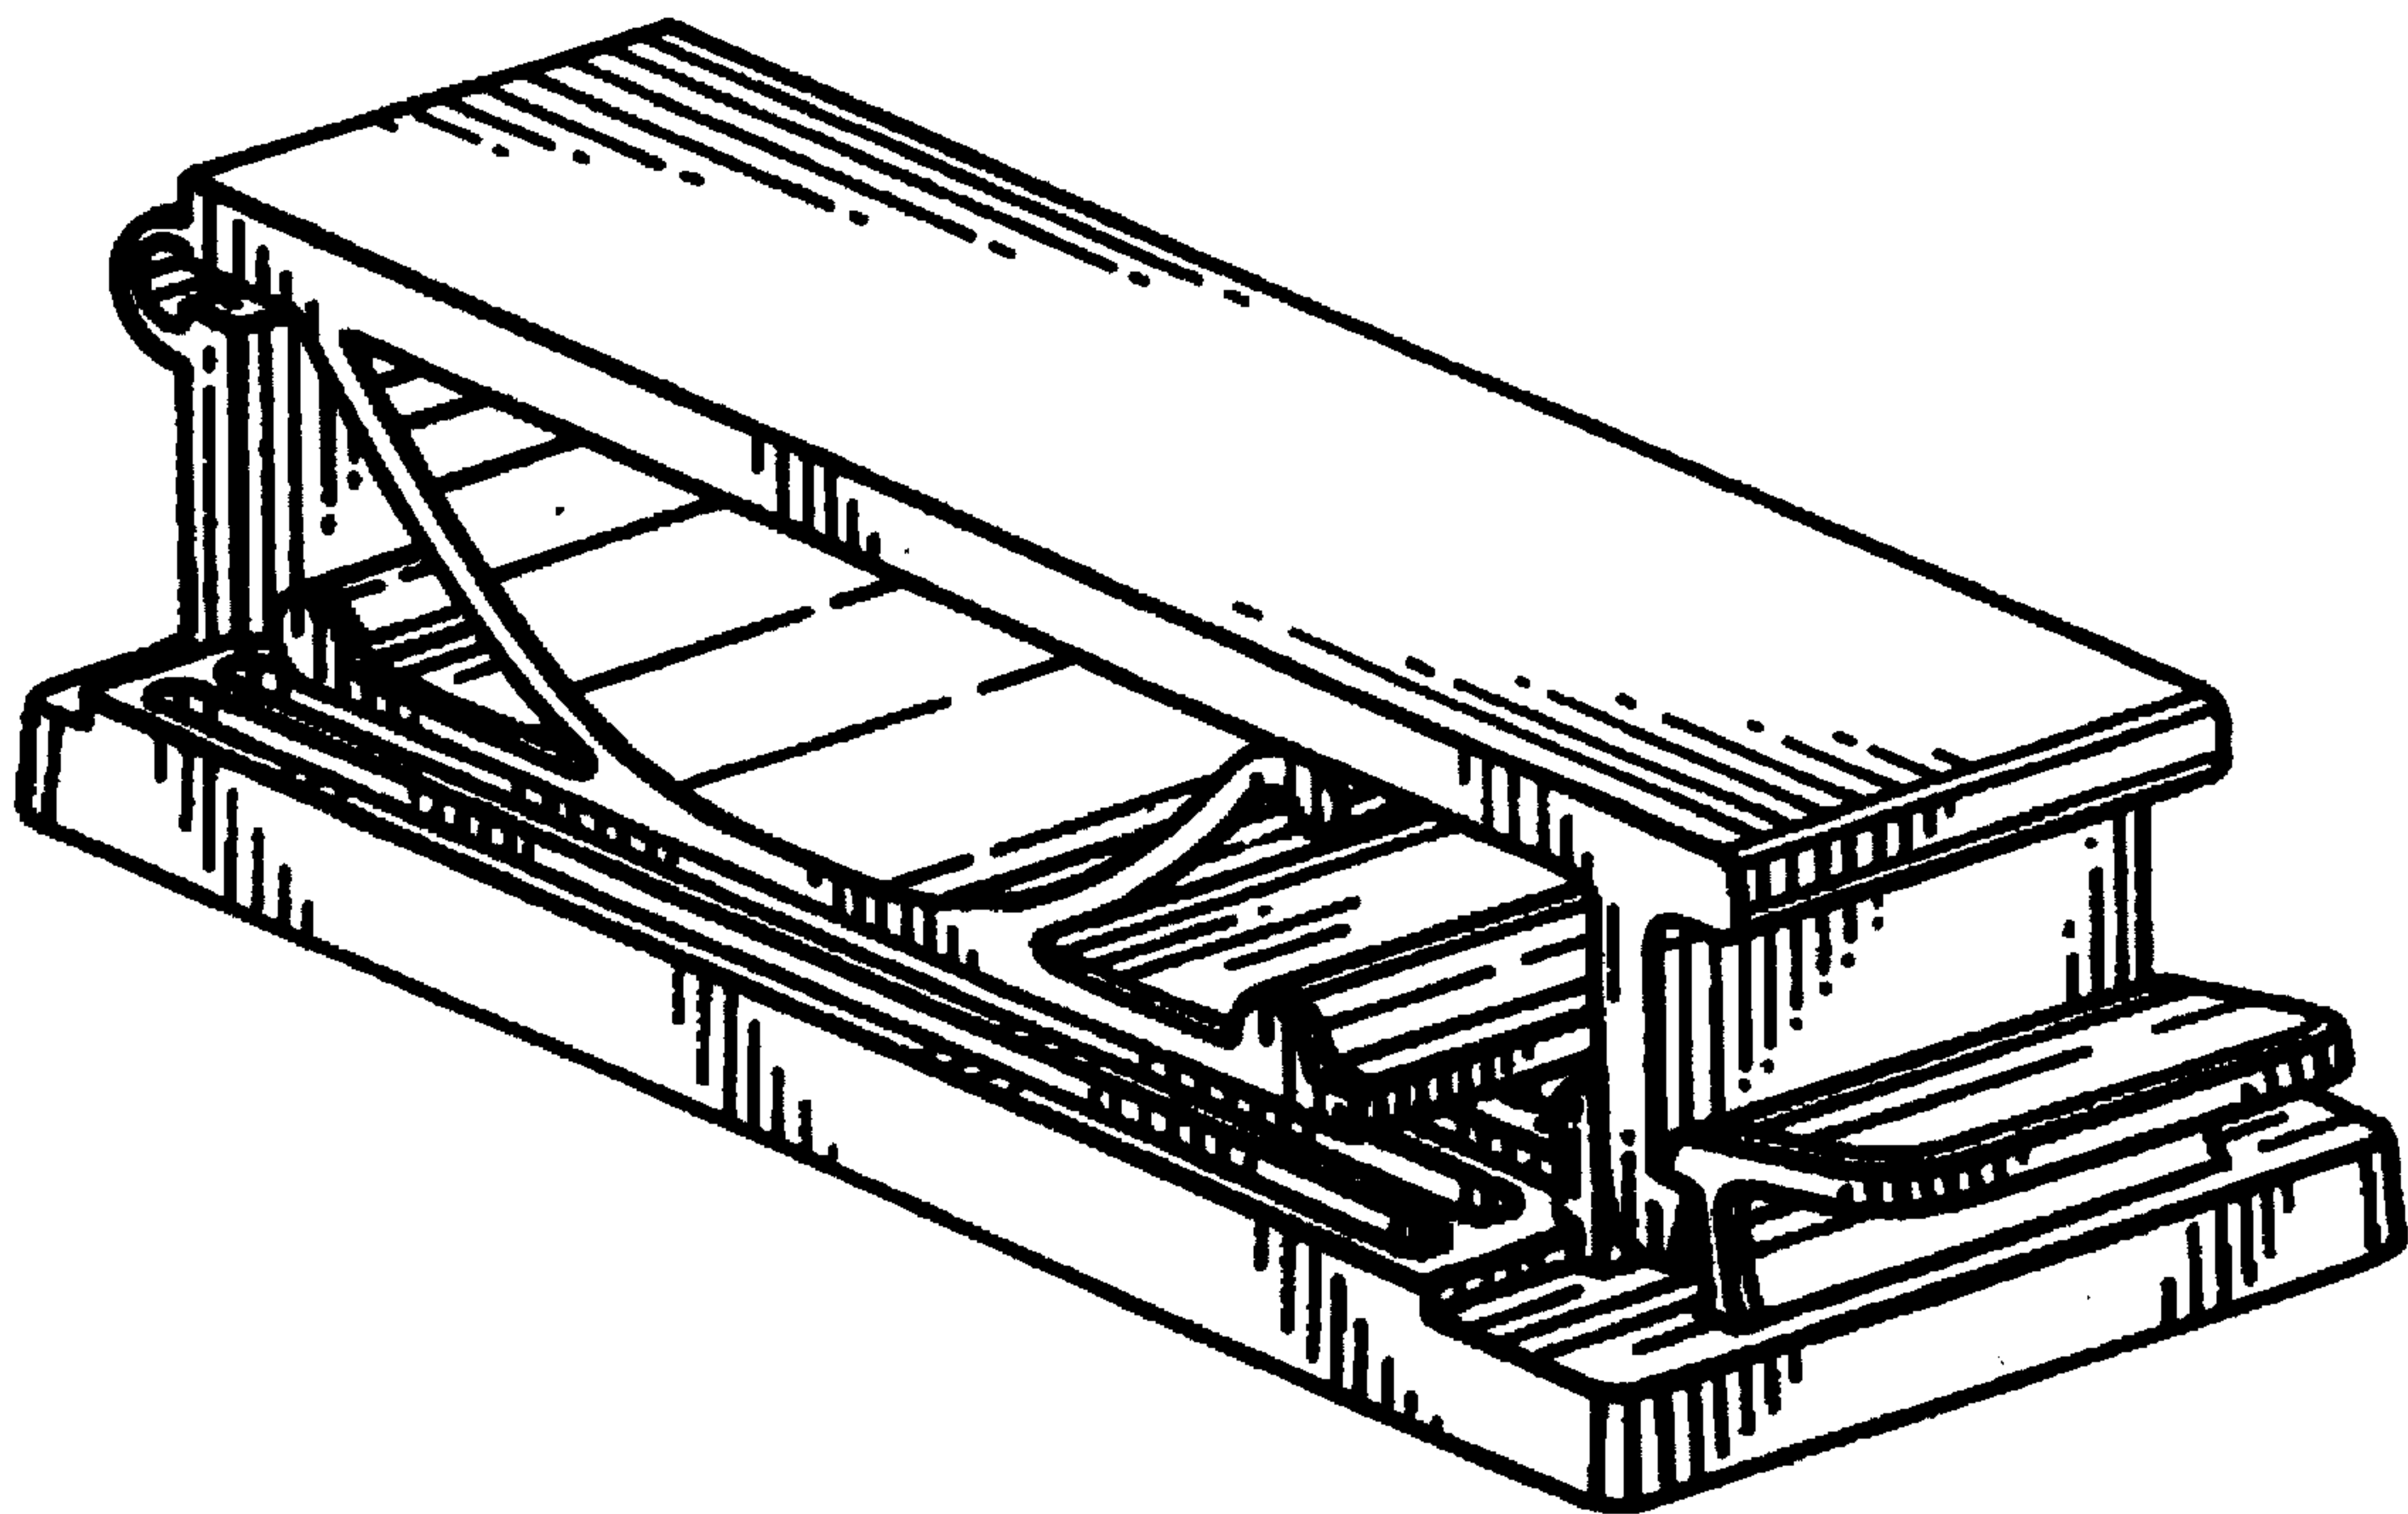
is a front perspective view of a flat cable clip showing my new design;
